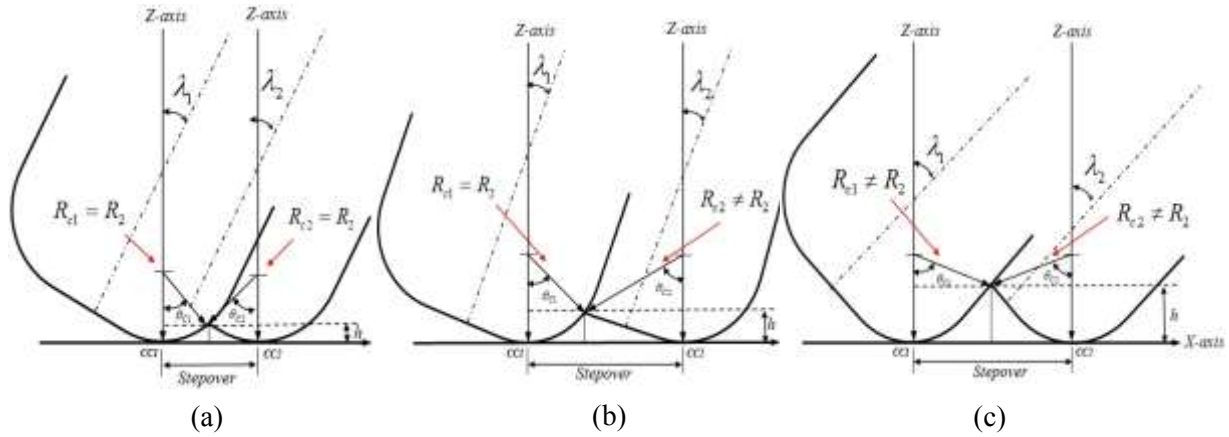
a, b & c). The types of intersection between two successive motion of end-filleted cutter.
